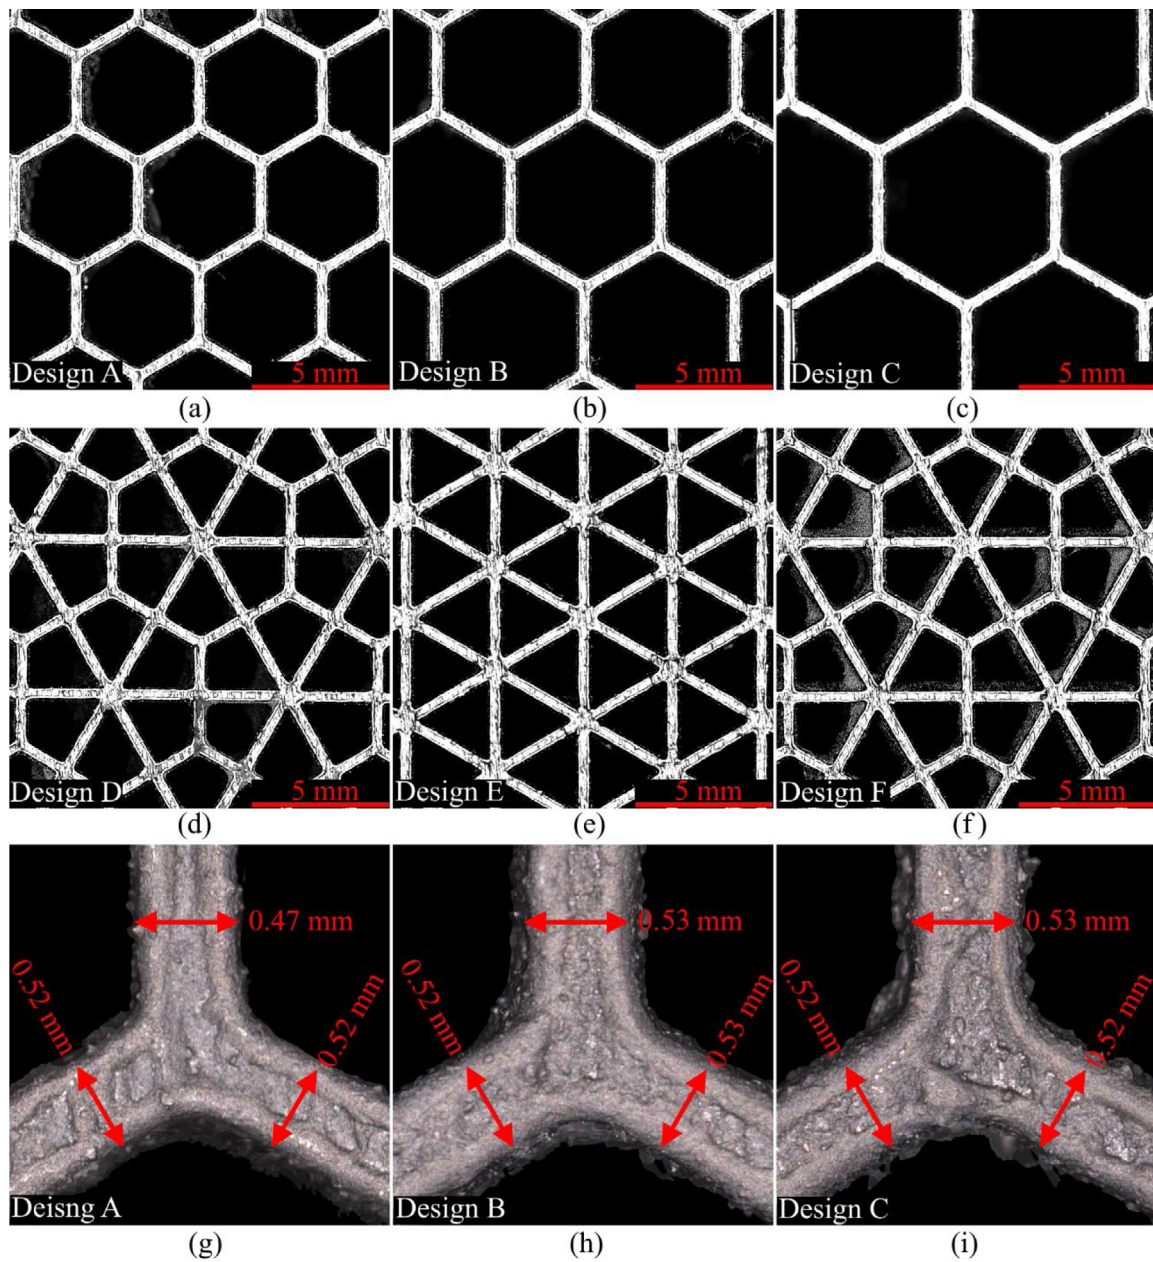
Frontal views of the fabricated structures (a-f) and examples of dimensional measurements performed to determine the accuracy of the manufacturing process.
